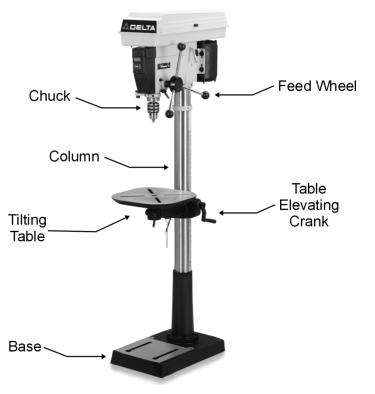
Drill press parts. (Courtesy Porter-Cable • Delta)
